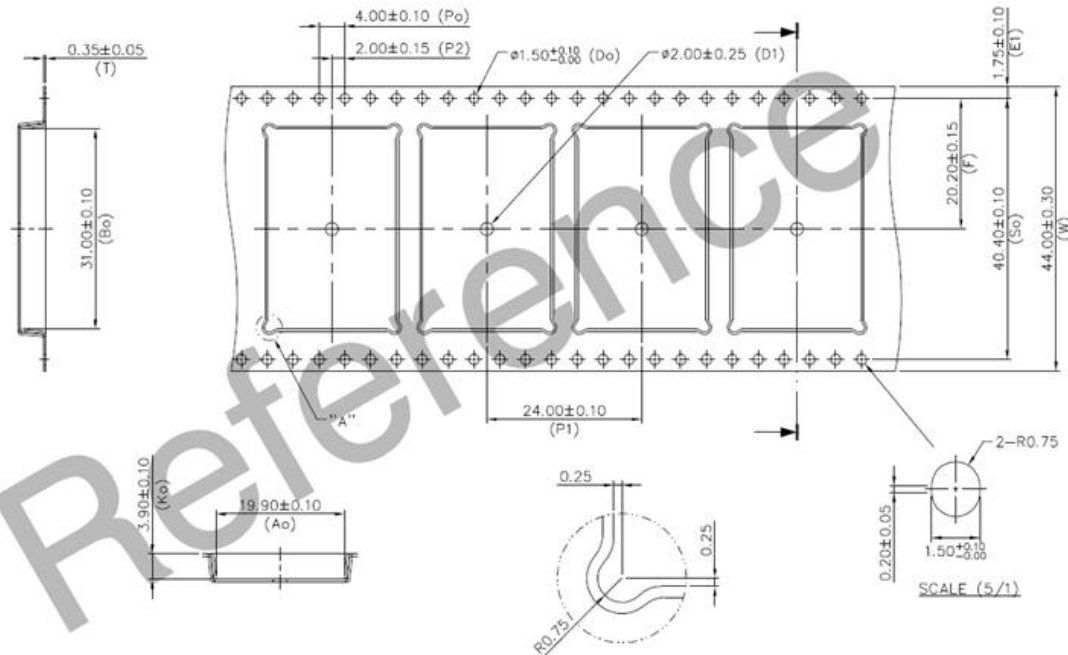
SN820X/820XUFL Carrier Tape Dimensions
